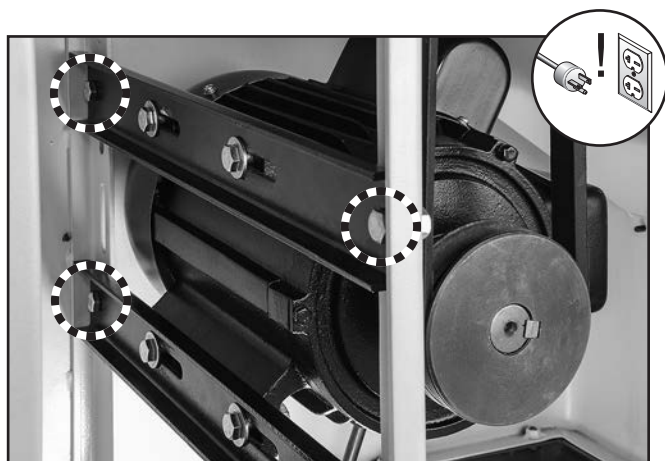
Location of motor mount bracket fasteners (3 of 4 shown).
